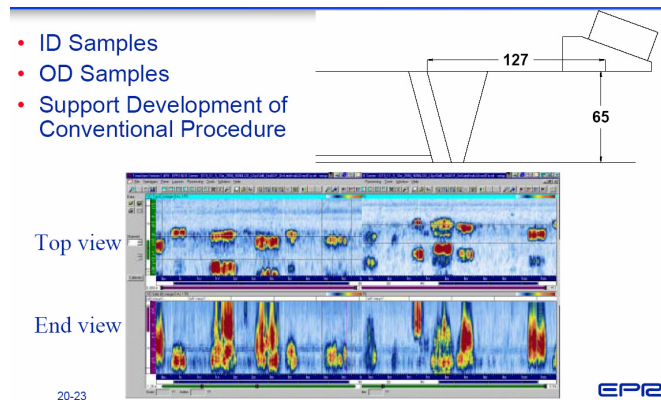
Results of ultrasonic inspection for EPRI mock-up of dissimilar metal weld inspection (Landrum et al. 2002).
